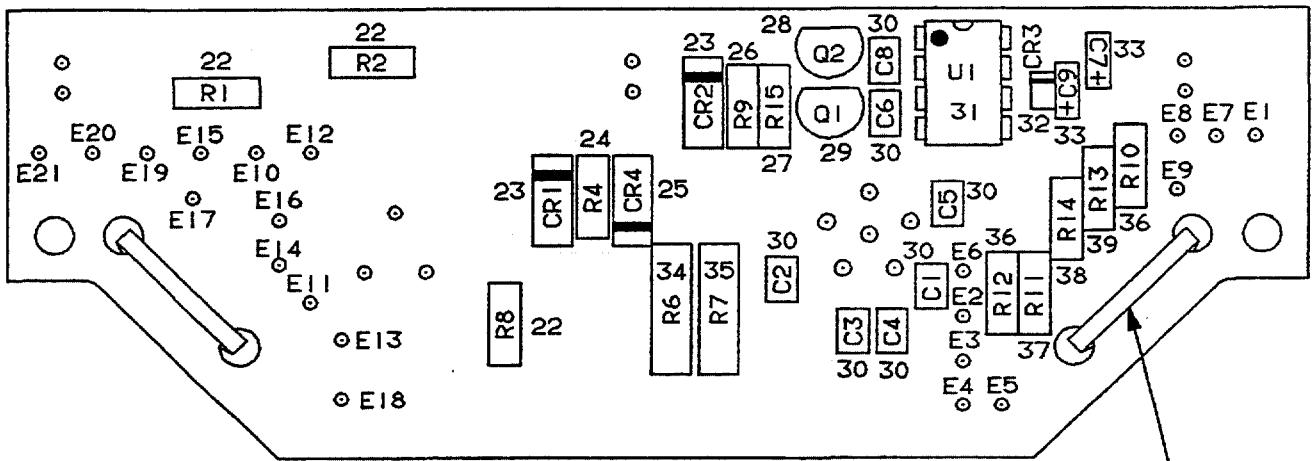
Power Supply/Audio Assembly (Sheet 1 of 3)
